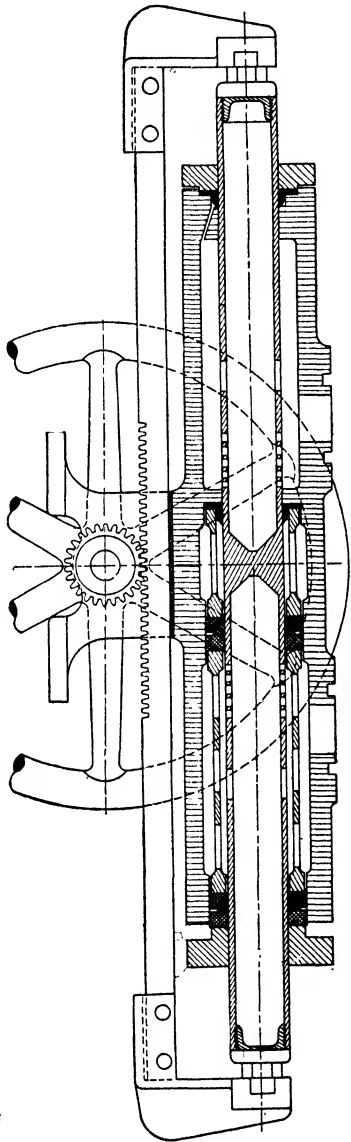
Section Showing Pilot-Wheel Operation of Control Valve for High Pressure
